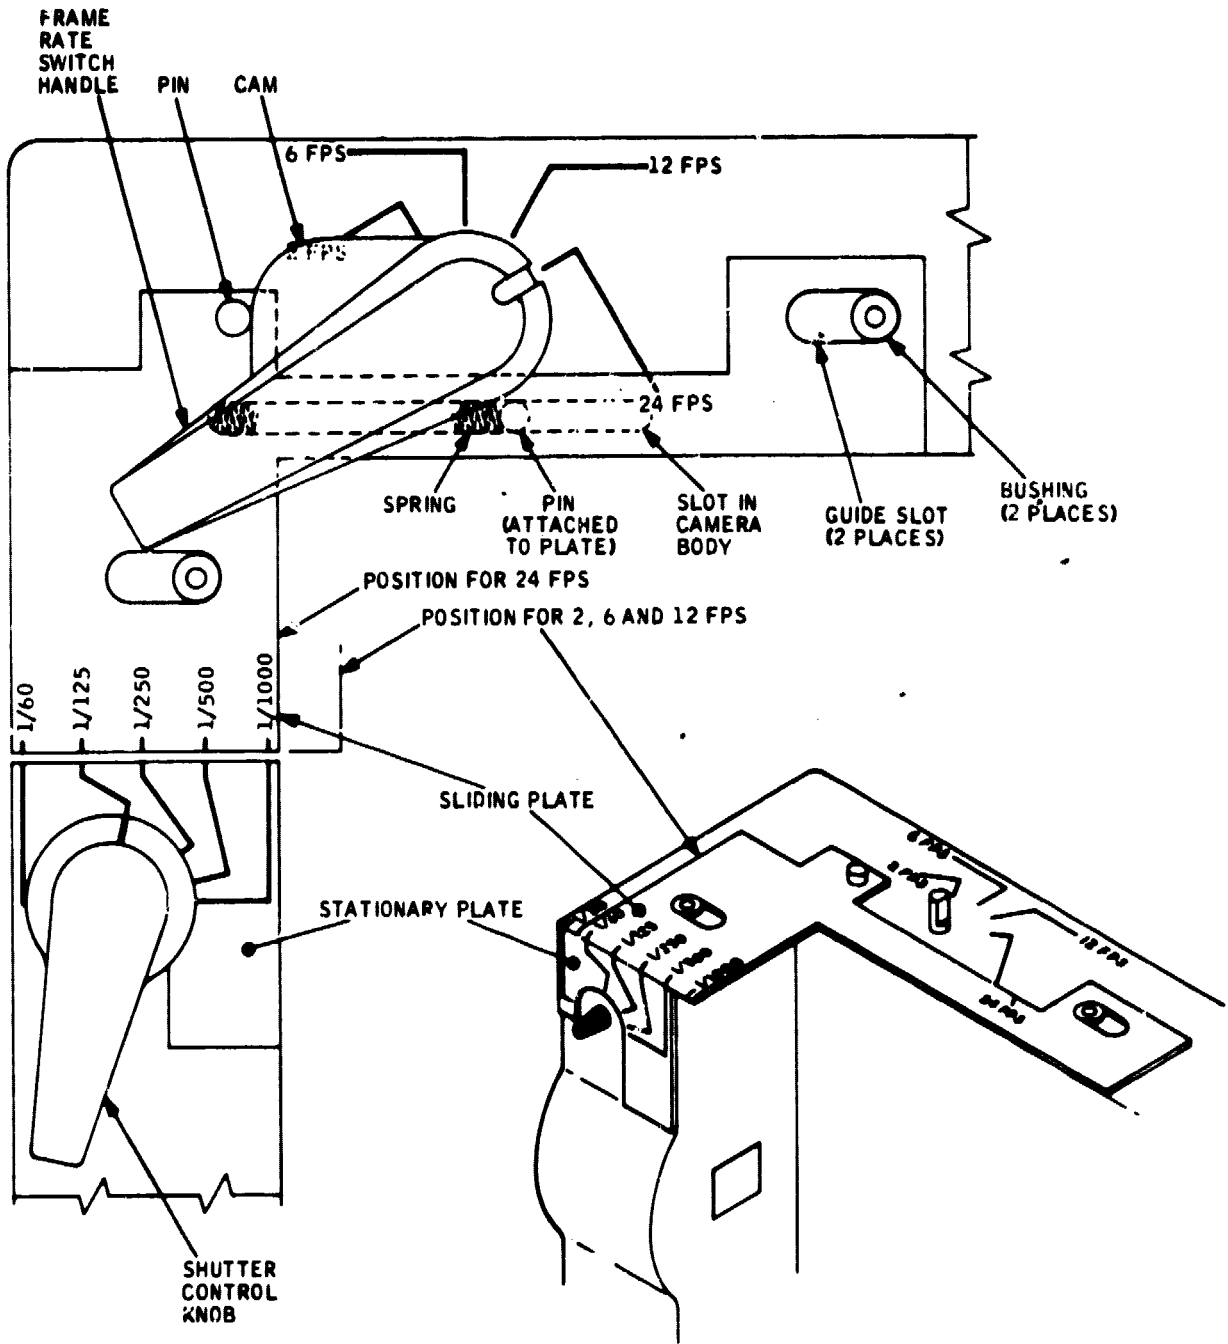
Shutter Control Knob Compensation Mechanism
